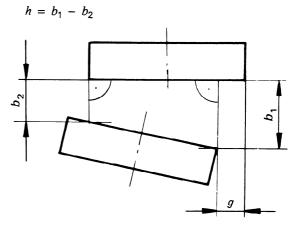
Contact fault in projection welding as a result of deformation of machine
